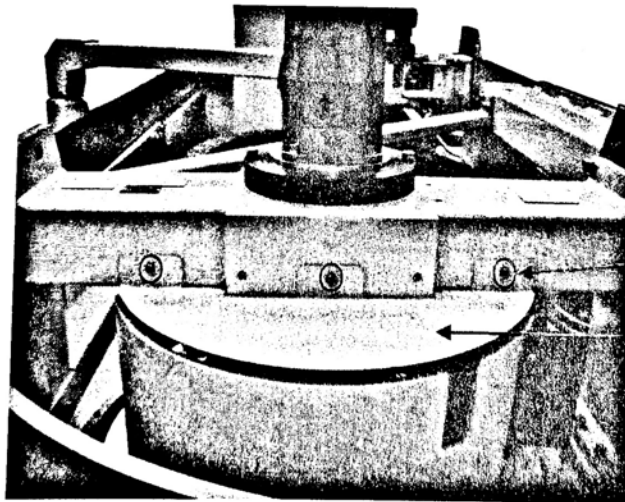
Cover, RAG Art. no. 332160.00, mounted above workpiece turret
